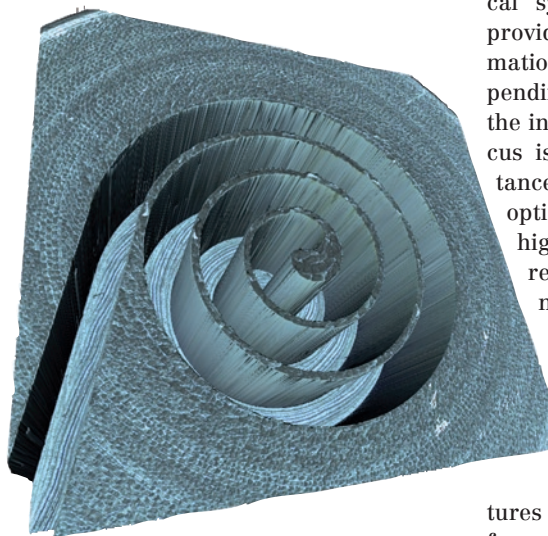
For all kinds of milling and drilling applications, robust surface measurement of machined tools is essential. Focus-Variation, a new optical measurement technique, allows robust measurement of steep flanks such as circular milling structures or tool edges.
